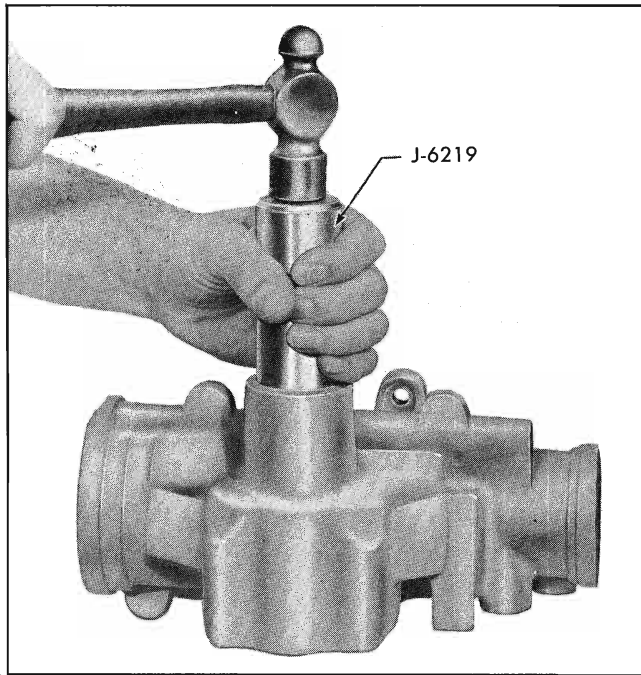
A-27 Installing Pitman Shaft Seals Using J-6219
